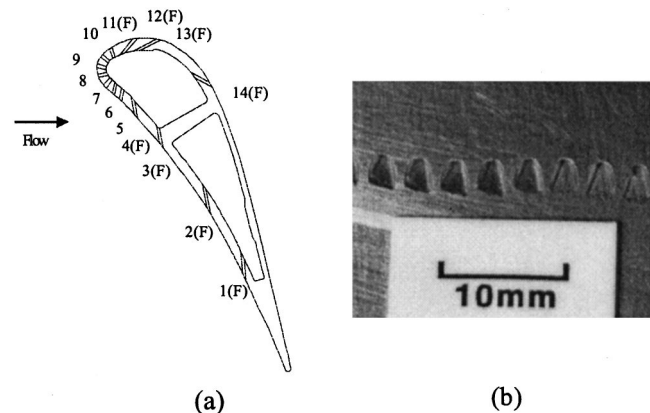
(a) Midspan cross section of a CHTT NGV and film cooling geometry, illustrating row positions and two-cavity construction. Holes marked (F) are fan-shaped in the fan-shaped geometry. (b) Close-up view of the fan-shaped holes.
